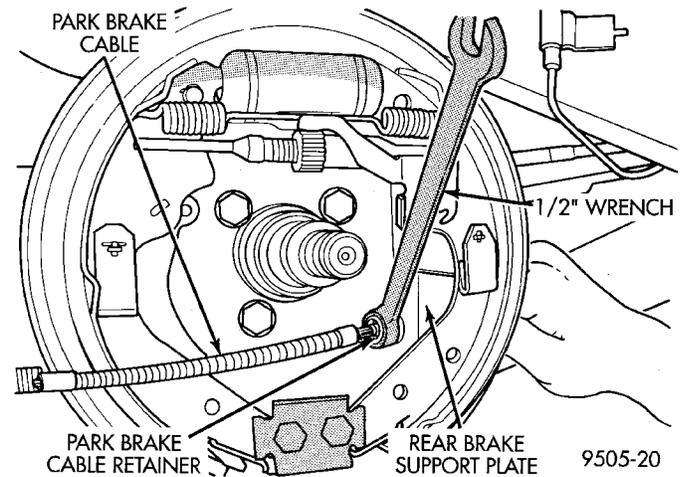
Park Brake Cable Removal From Brake Support Plate
